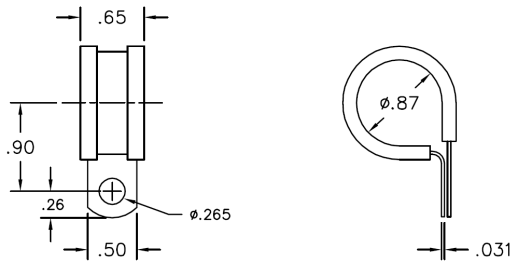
Optional Mounting Clamp Physical Dimensions (Inches)
